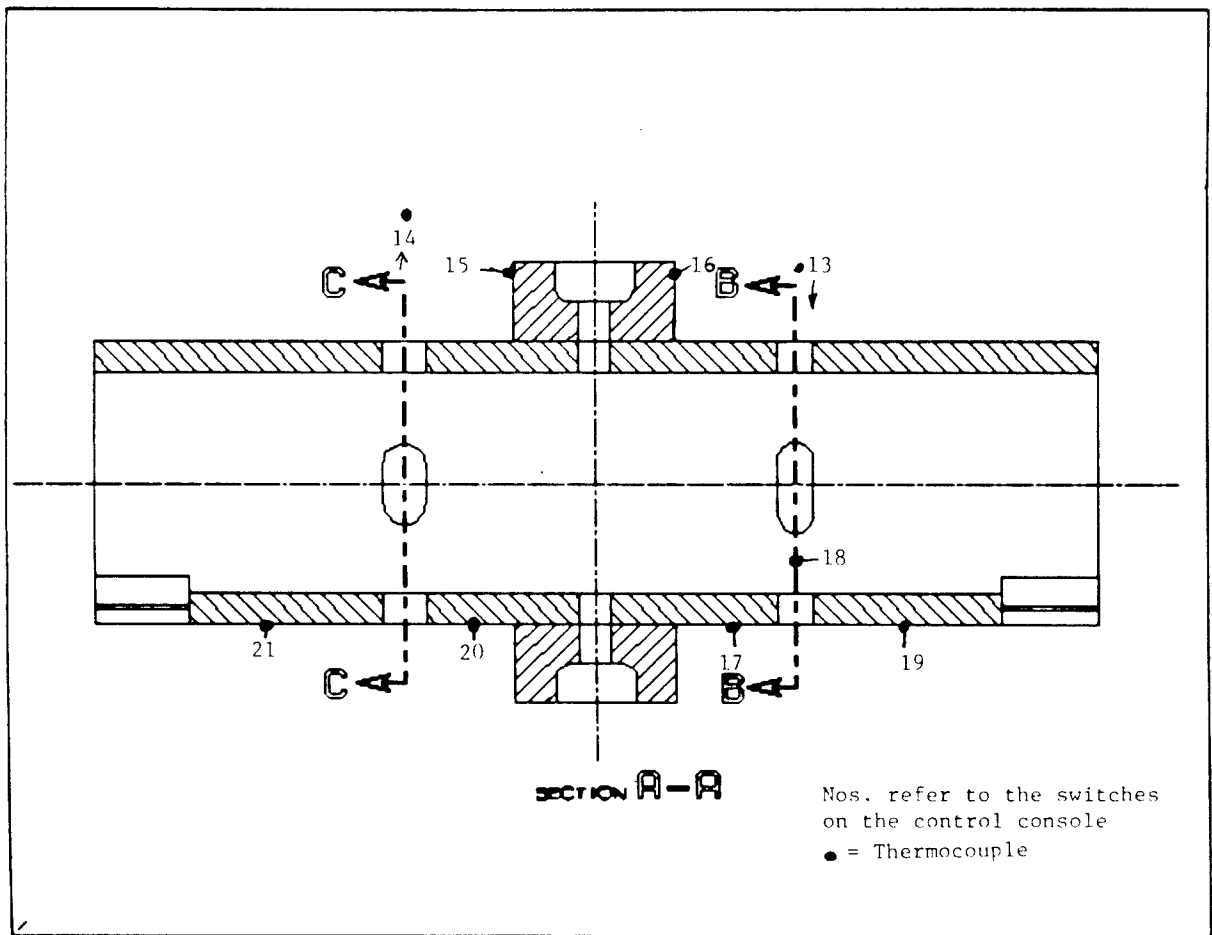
Cylinder Schematic with Thermocouple Locations
